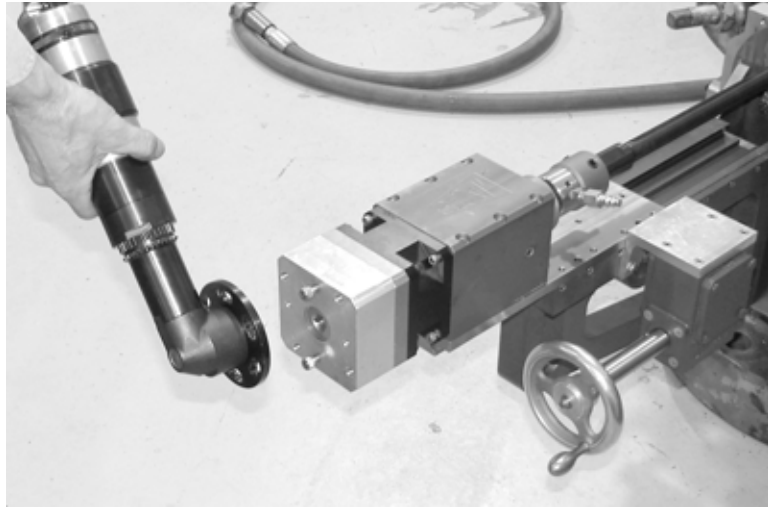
Install the air motor by putting the flange over the two screws in the drill housing. Turn the drill to lock the screws in their slots, and tighten the screws securely.
